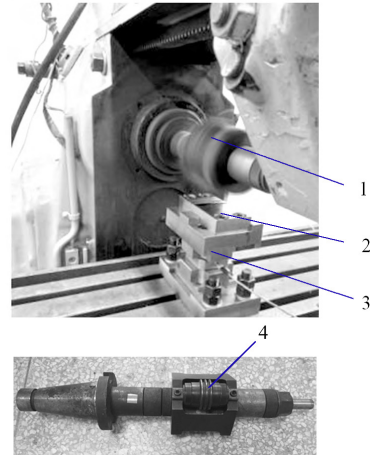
Cold roll-beating experimental equipment; 1 machine tool spindle, 2 workpiece, 3 triaxial forces sensor, and 4 the roller
